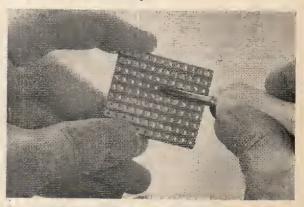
Fig. I. Breaking the copper strips. The spigot on the end of the tool is located in the appropriate hole; the tool is then turned clockwise to cut the strip
